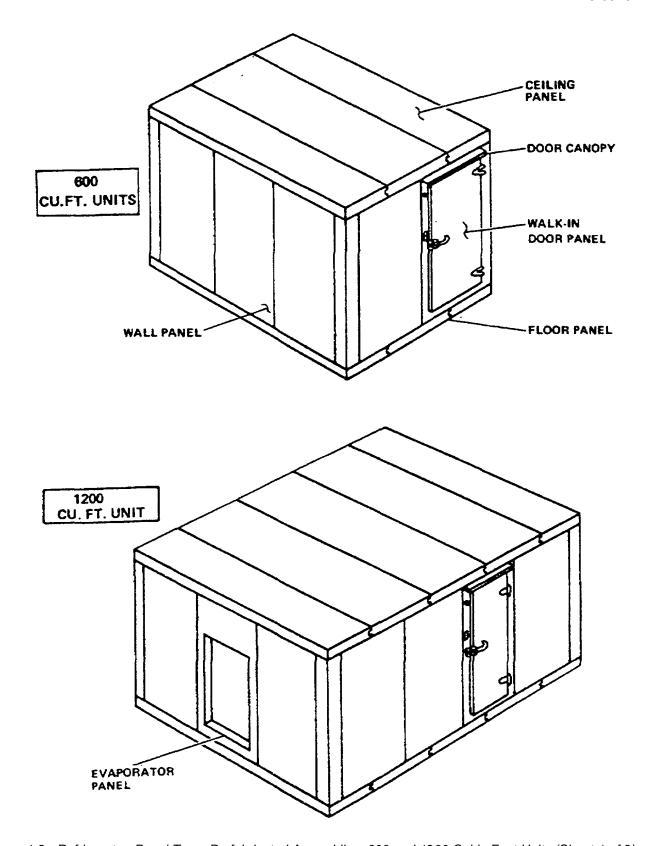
Refrigerator, Panel Type, Prefabricated Assemblies, 600 and 1200 Cubic Feet Units (Sheet 1 of 2)
